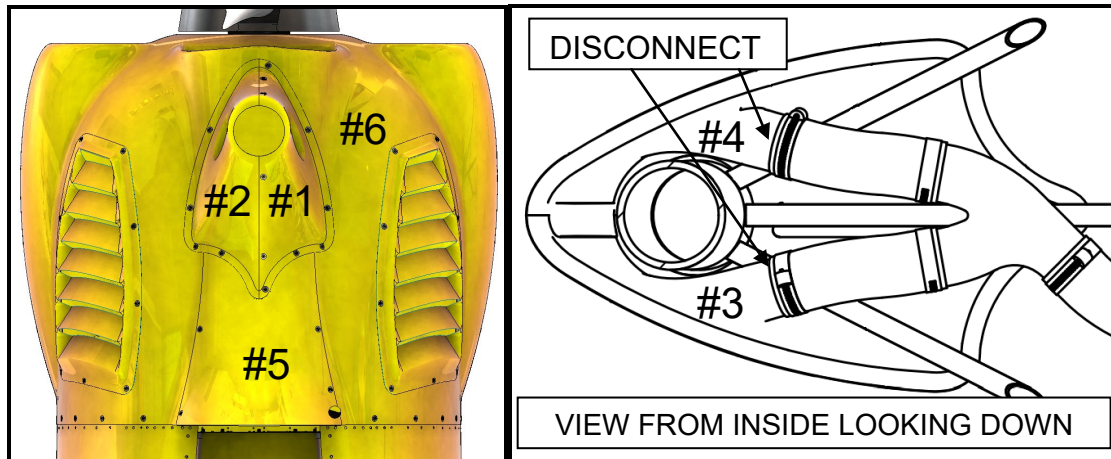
Nose Gear Lower Cowl Panel Removal Order (#1 Thru #6)
